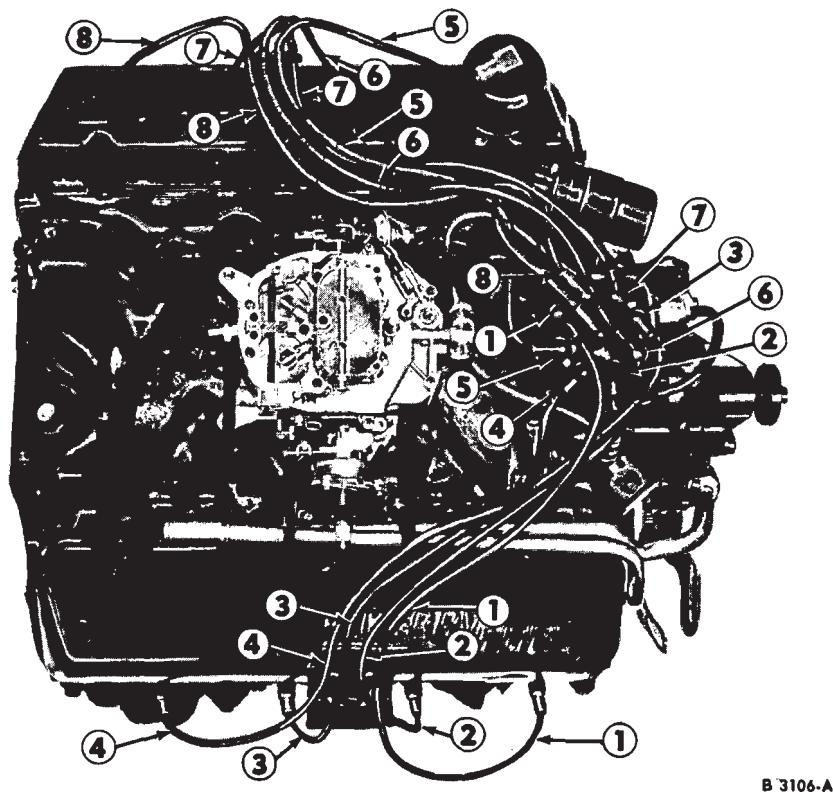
Typical V-8 Ignition Wiring (Except 351 Engines)
